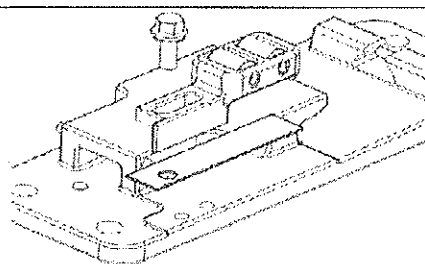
Height adjustment (Assembly shown without rails and fastening material)
